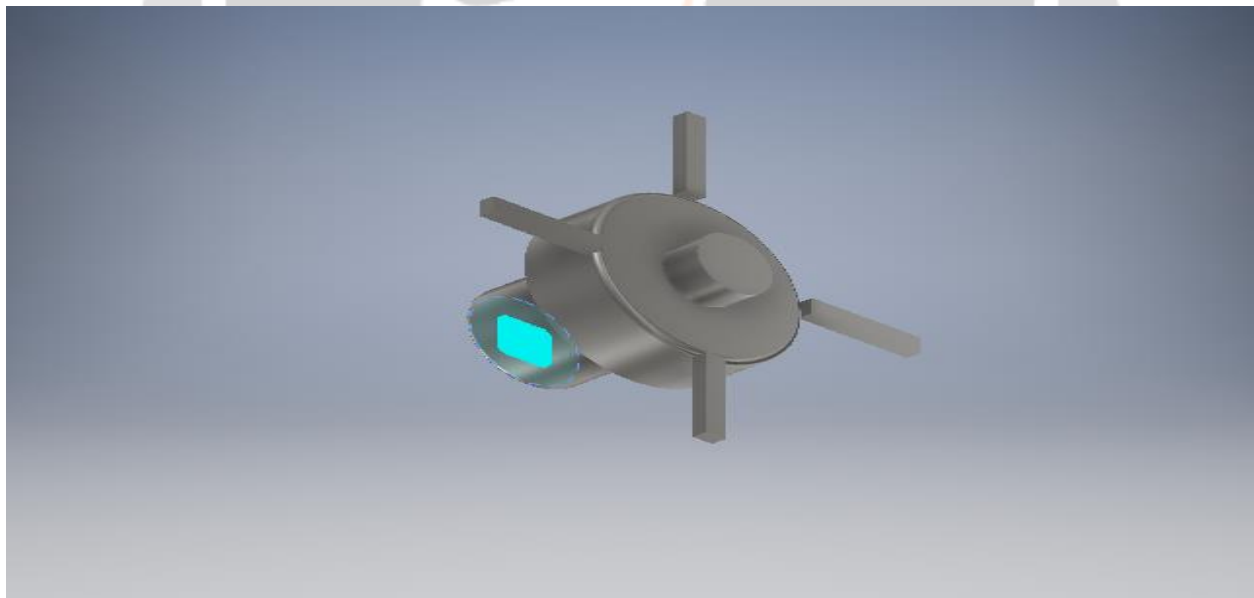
Solid View of Wind Turbine Rotor Showing Reaction on Shaft
